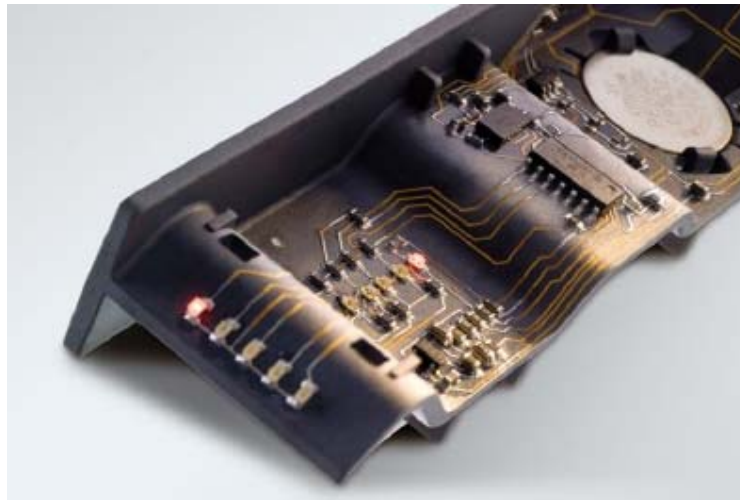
(a) : 3D-MID circuit with assembled components.[3]
